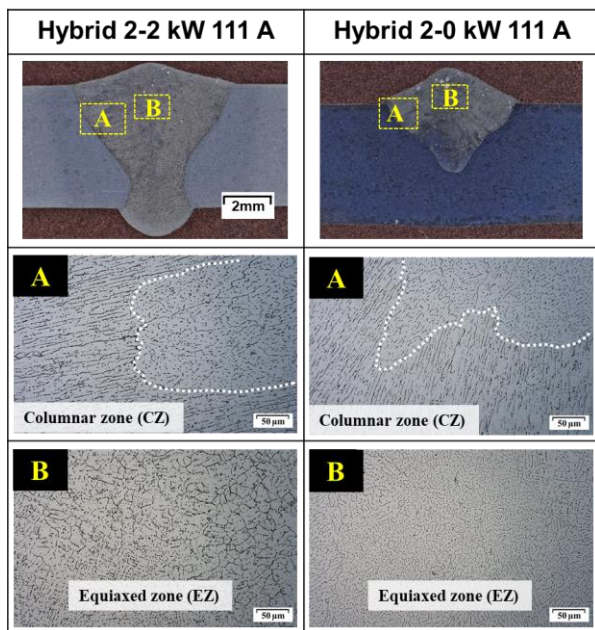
macro- and micro- structure of dual beam hybrid and core beam hybrid welding.
